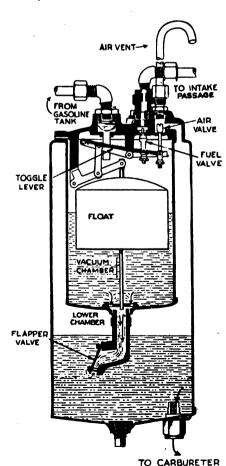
Cross section of the Stewart Vacuum Tank with the operating parts marked. The toggle mechanism snaps the two valves open or shut as the case may be
